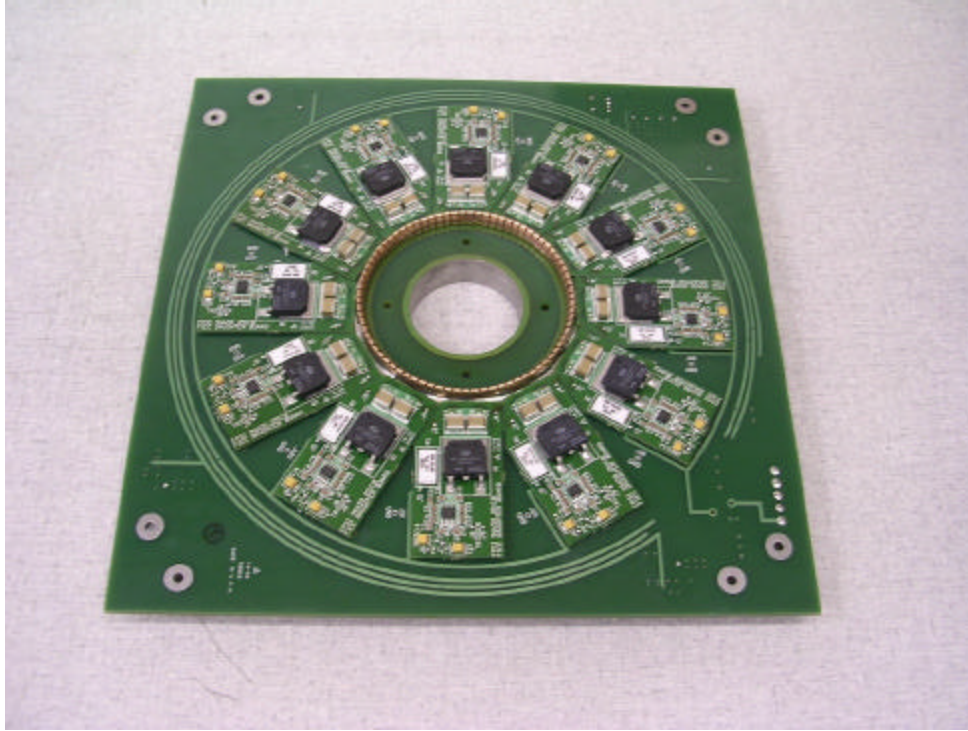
Completed modulator board. Upper side showing the 12 daughter boards, each mounting one FET, and the fingerstock ring used to connect to the adjacent board.
